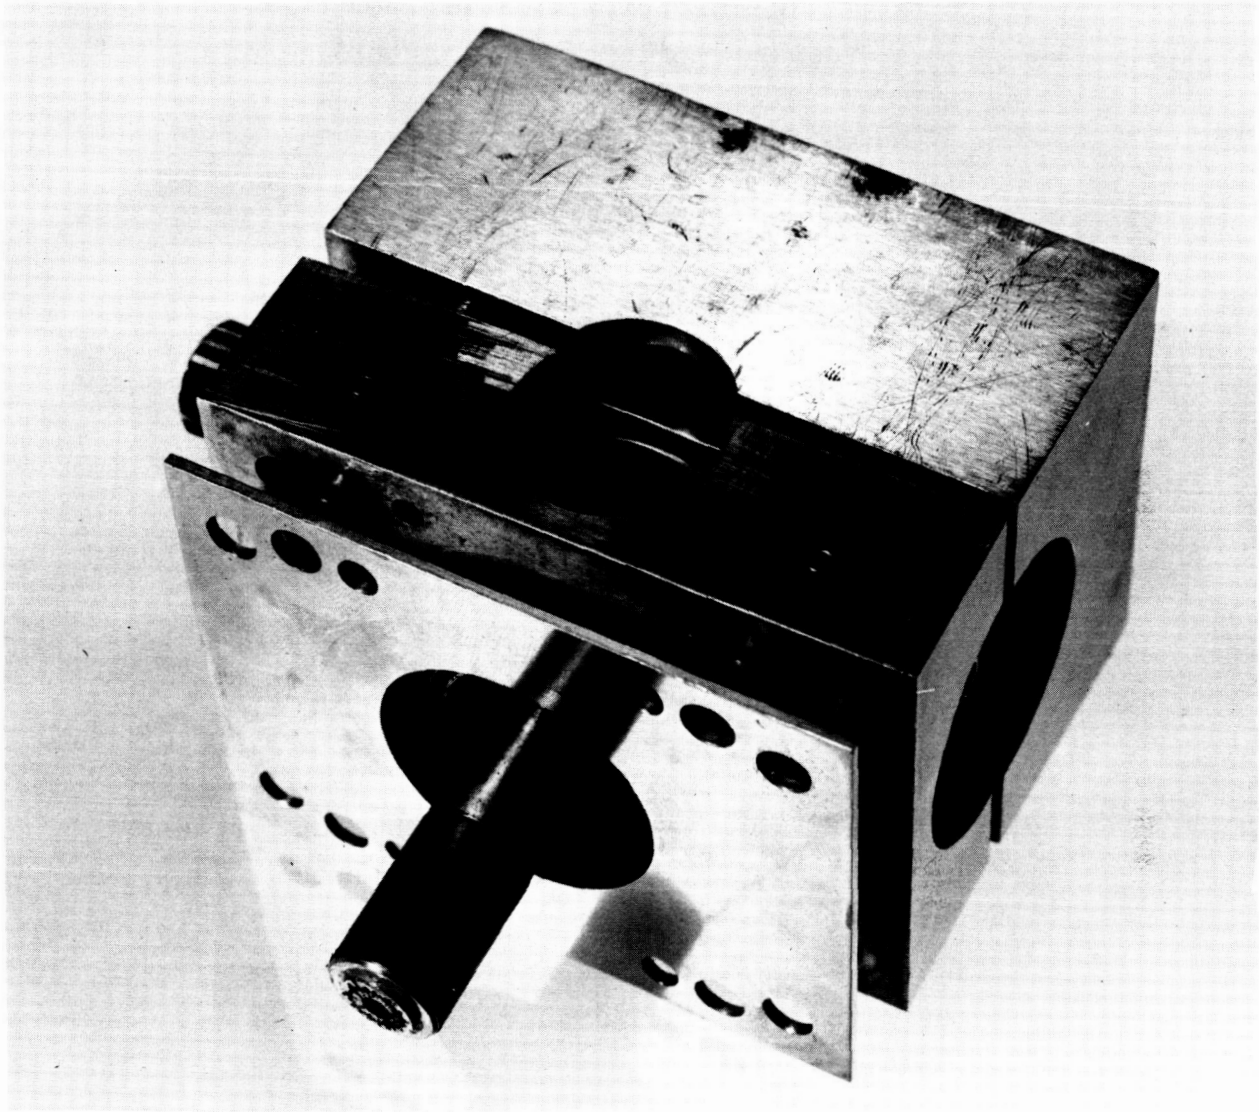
Compressor Rocker Arm Pin (After 100 hr.
